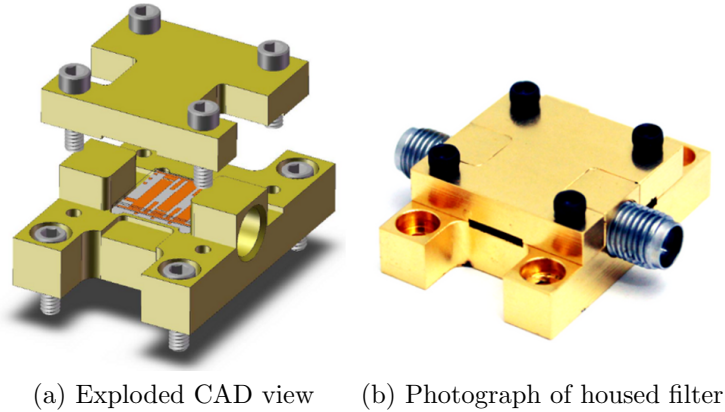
Exploded CAD view and photograph of assembled gold plated housing.
